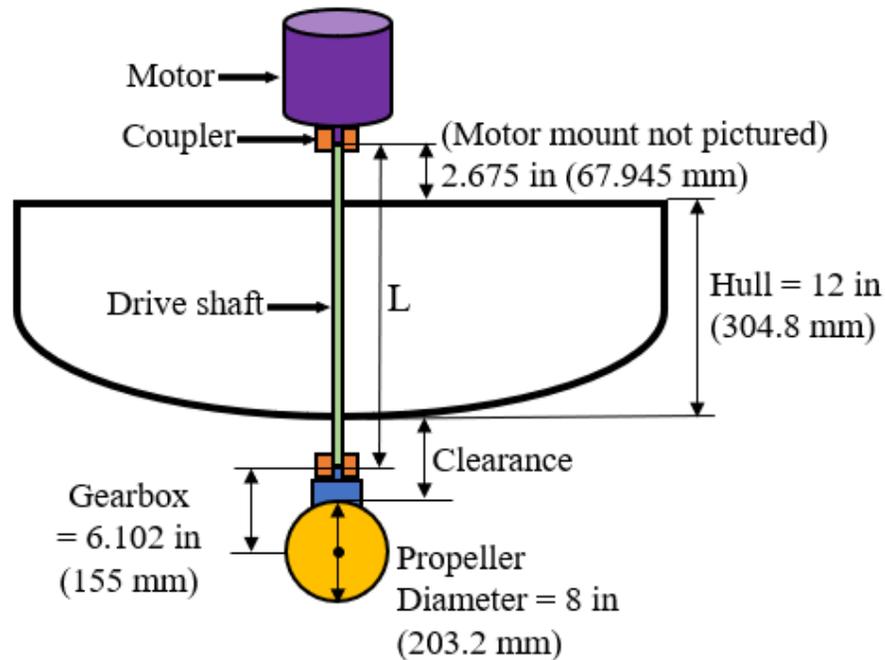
View of the Back of the Boat for Drive Shaft Length Calculations
